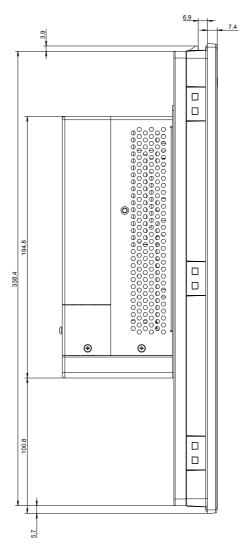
Housing dimensions of the device VR4x21, left side view
